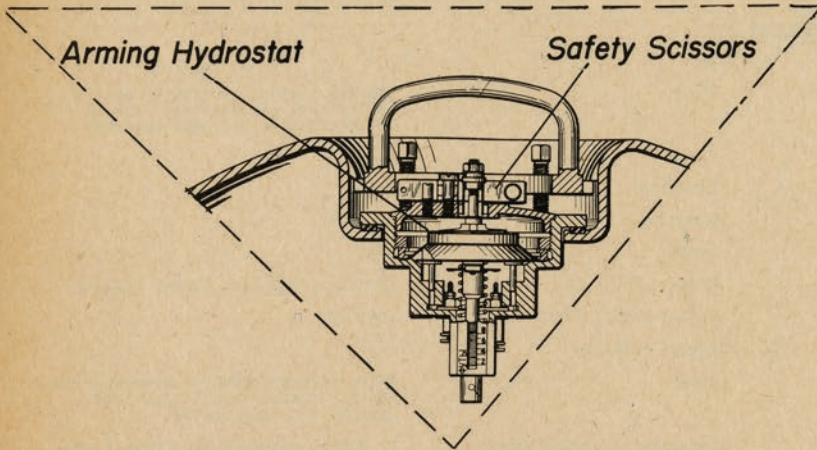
Mine Mark M AMG-1, Hydrostatic Arming Switch, Sectional View
